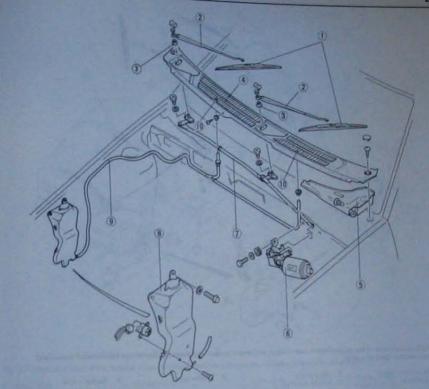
Exploded view of the windscreen wiper and washer components - September 1985 models onward (Secs 22 and 24)
